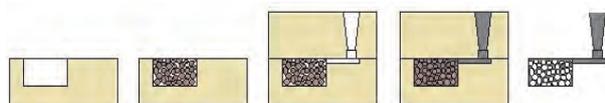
Principle of infiltration of molten metal into mould filled with precursors, from left: mould, mould cavity filled with precursors, composite foundry mould, pouring molten metal into the mould cavity, cast metallic foam after removing precursors.
